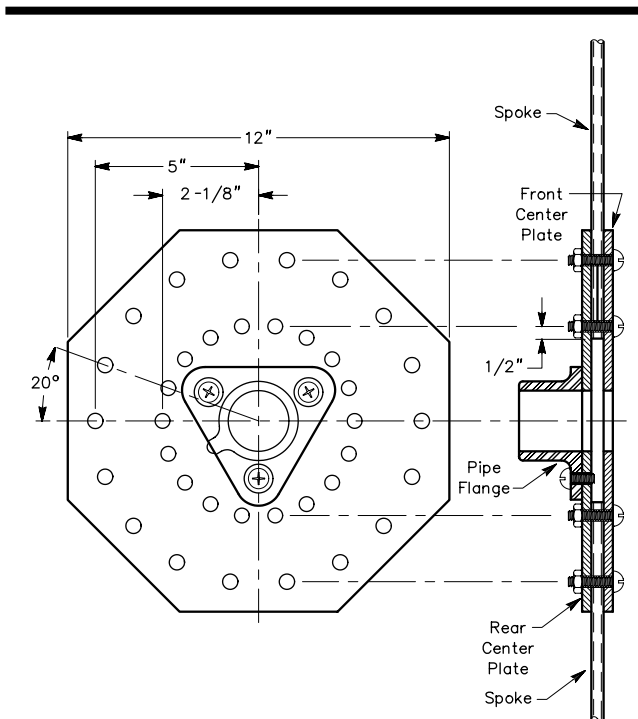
Center plate details. Two center plates are bolted together to hold the spokes in place.
